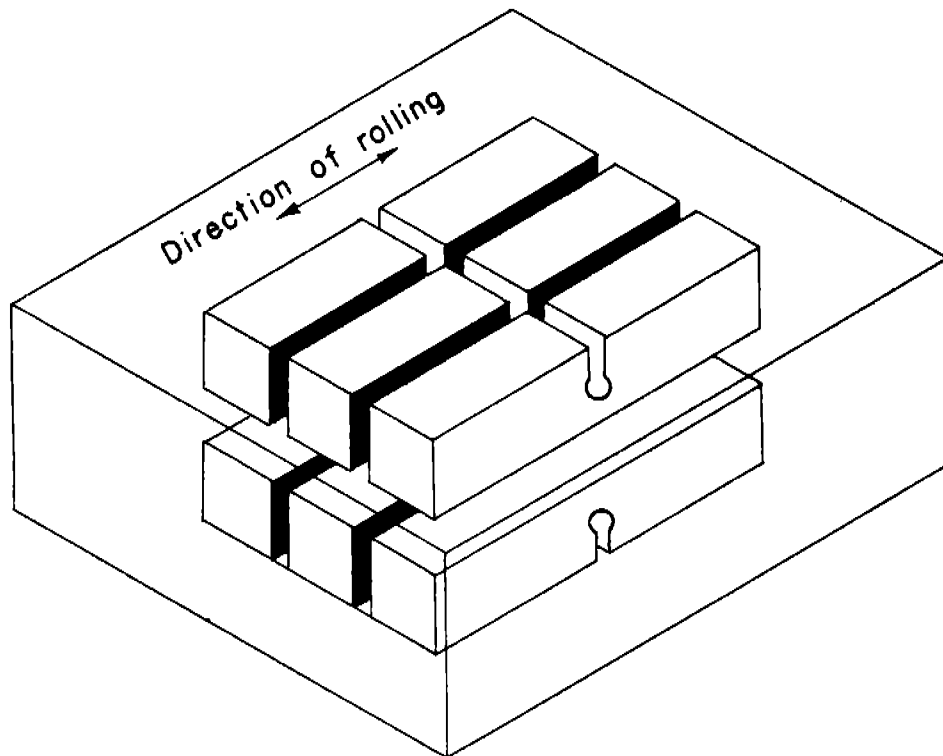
SKETCH SHOWING LOCATION OF STANDARD KEYHOLE CHARPY SPECIMENS WITH RESPECT TO PLATE SURFACES AND THE DIRECTION OF ROLLING
